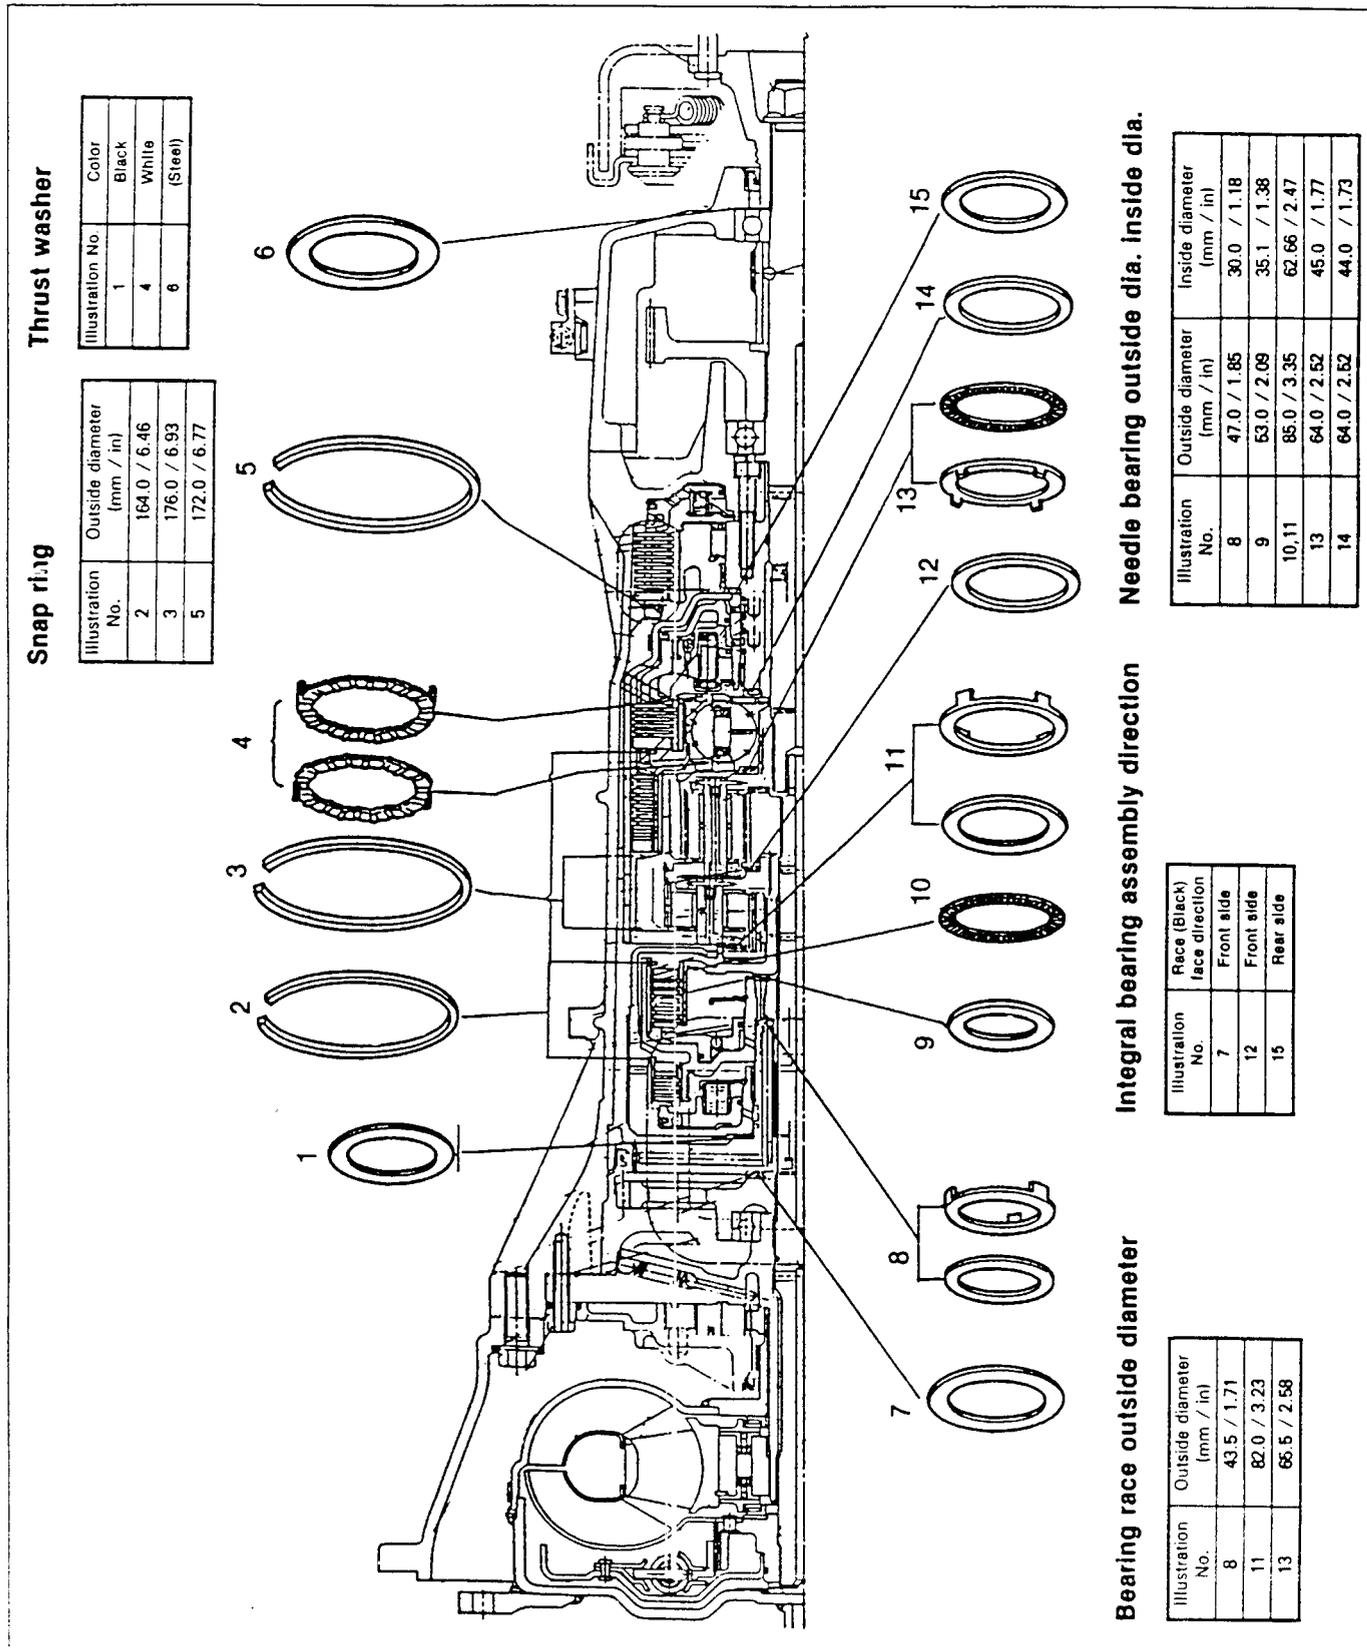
Snap Ring, Bearing Race, Washer Assembling Position and Dimensions
